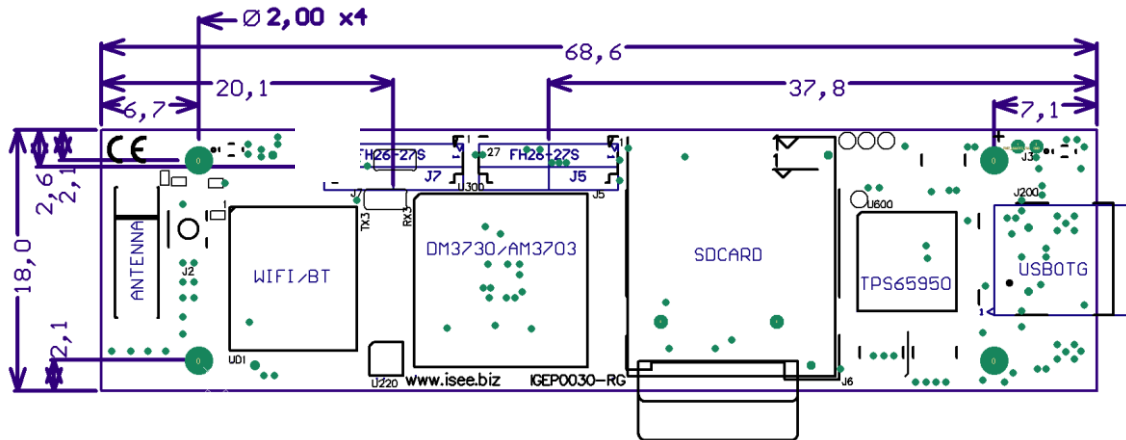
IGEP™ COM MODULE DM3730/AM3703 RG version Mechanical View TOP
